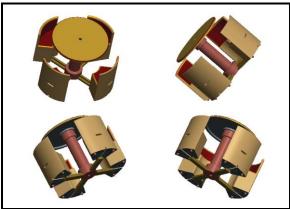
Assembly of Rounded Movable Seating Arrangements in different View
